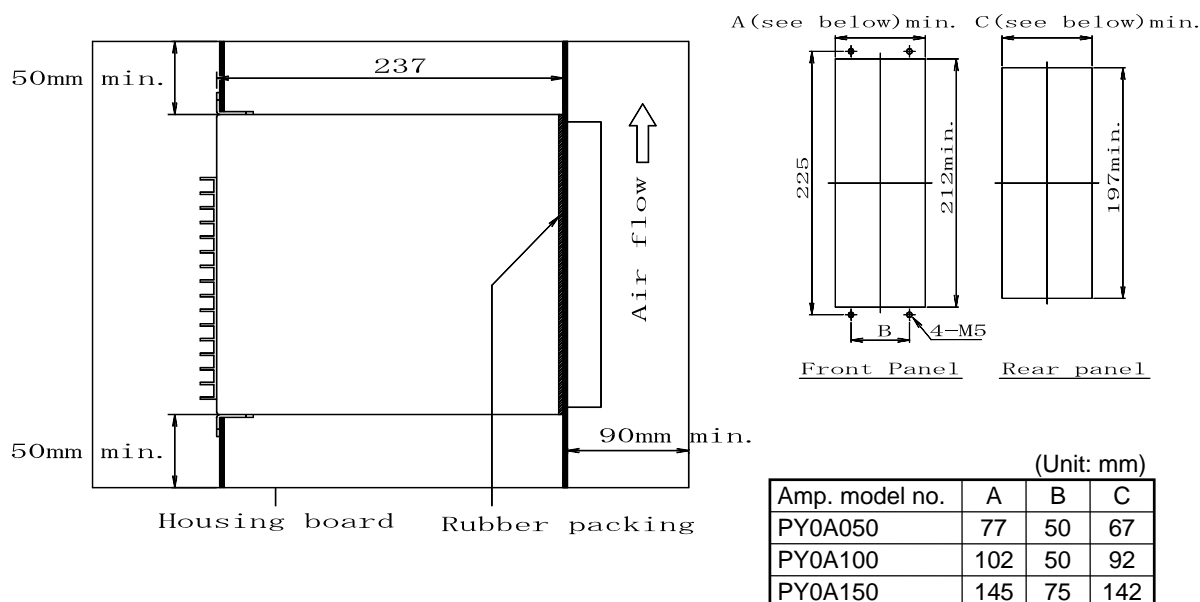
Front Mount Method (PY0A050, PY0A100 and PY0A150)
